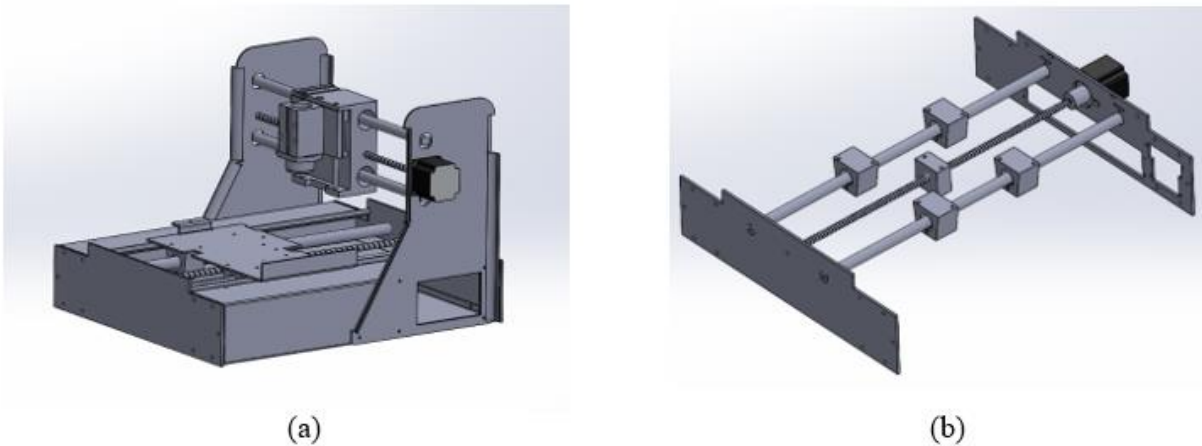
Solidworks models of (a) PCB machine and (b) Y-axis Rails
